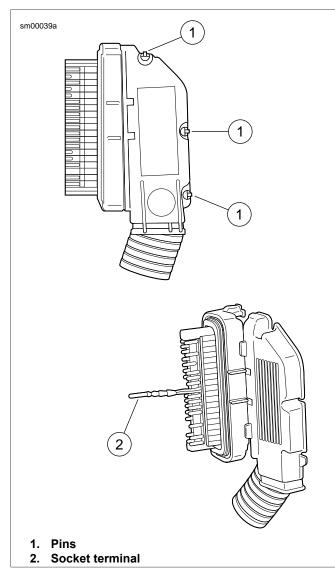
Delphi 100W Micro-Pack Sealed Connector: Separate Halves of Socket Housing
